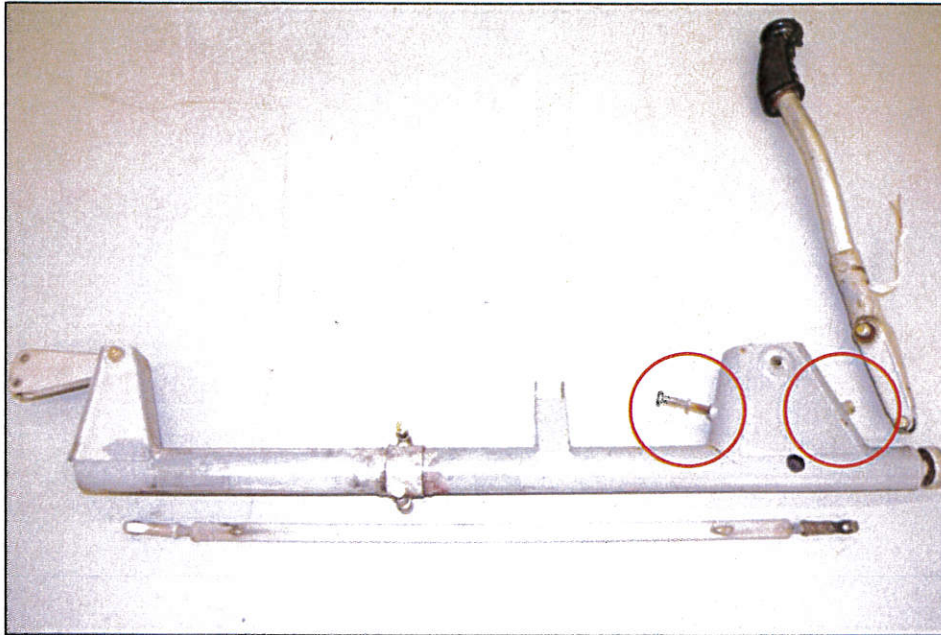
Pitts S-1S elevator control stick, torque tube, elevator stop bolts and forward elevator push-rod
